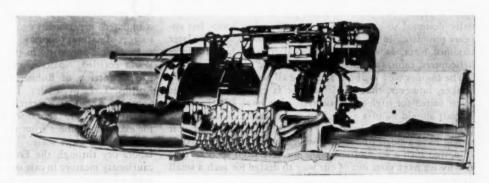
CUT-AWAY DRAWING OF WESTINGHOUSE JET ENGINE
